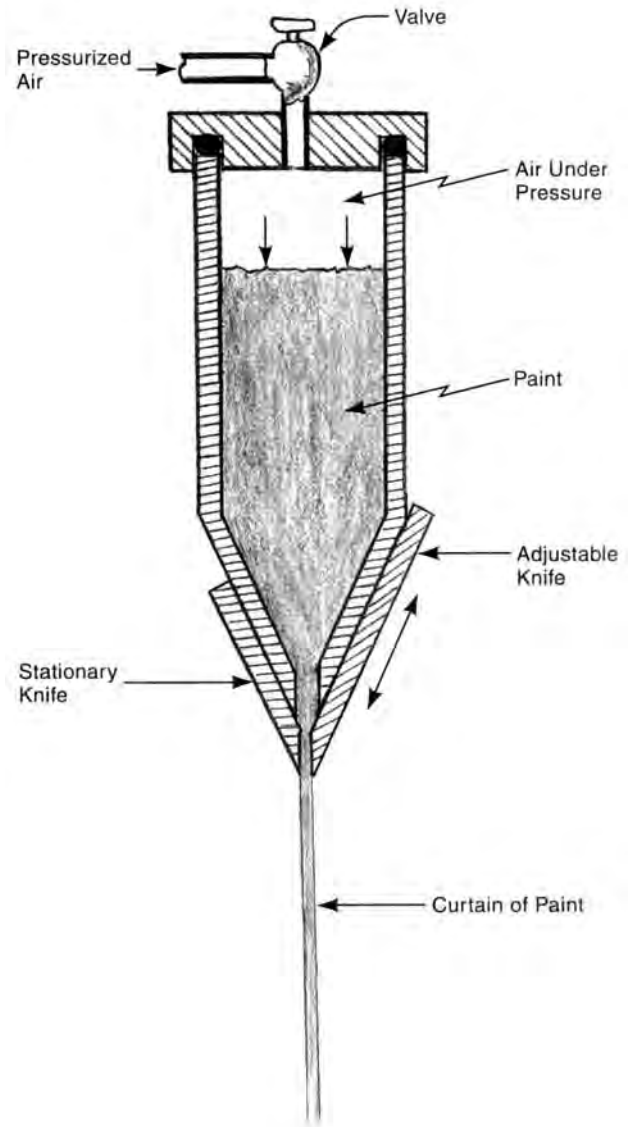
D3 Sectional view of curtain coating equipment. Workpieces are painted as they pass through the falling curtain of paint.
